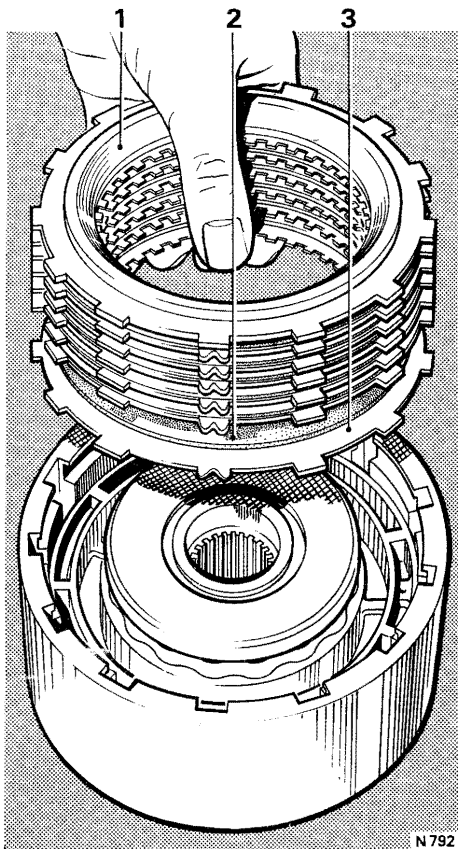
FITTING THE DIRECT CLUTCH PLATES
